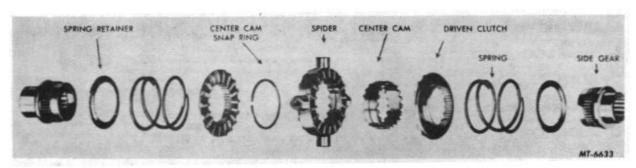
External Spring Design Differential Locking Unit (Exploded View)
